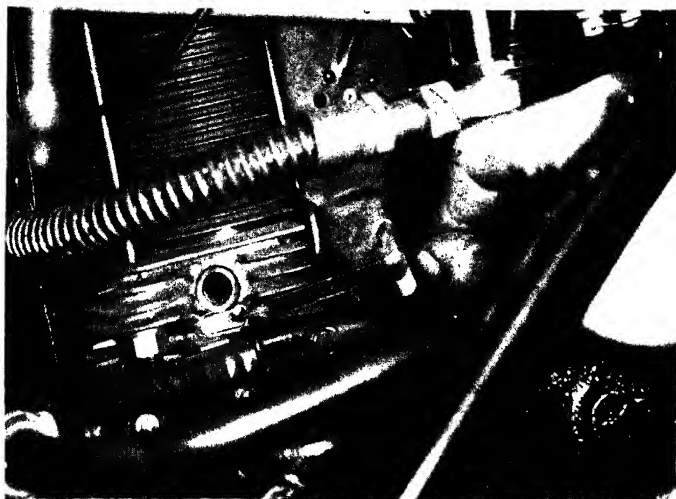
THE FACE FOR THE ATTACHMENT OF BLIND REVAL TYPE THERMO-COUPLE.
